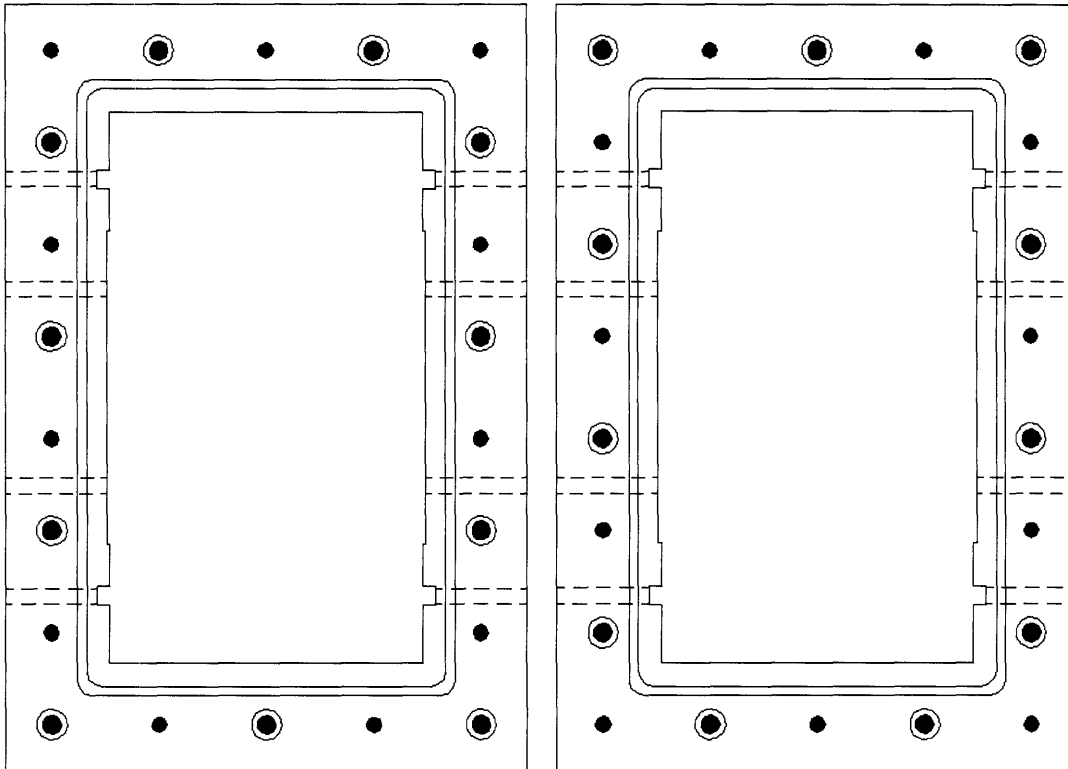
Bolt through-hole and tap hole pattern, the pattern is reversed to bolt two modules together.
